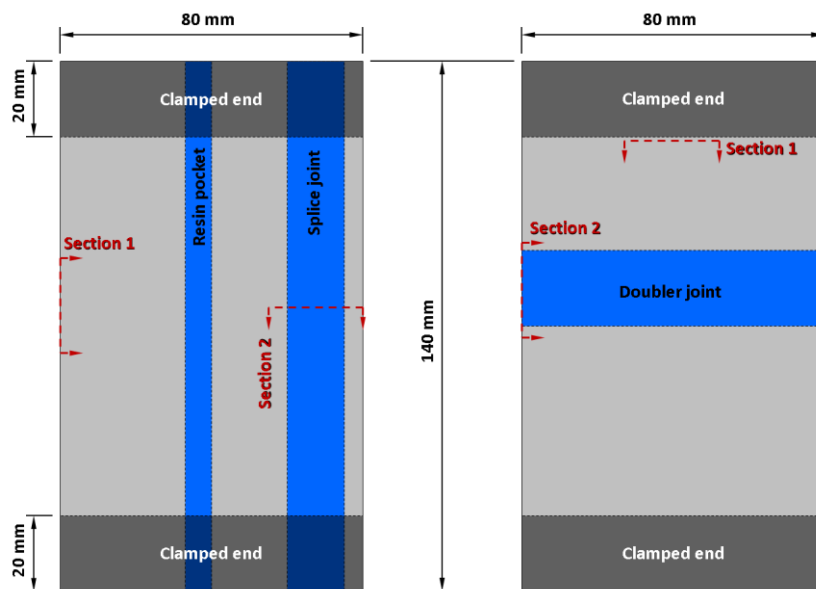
Sections of the Glare®4B specimen observed under SEM, (a) longitudinal splice and (b) transverse doubler.
